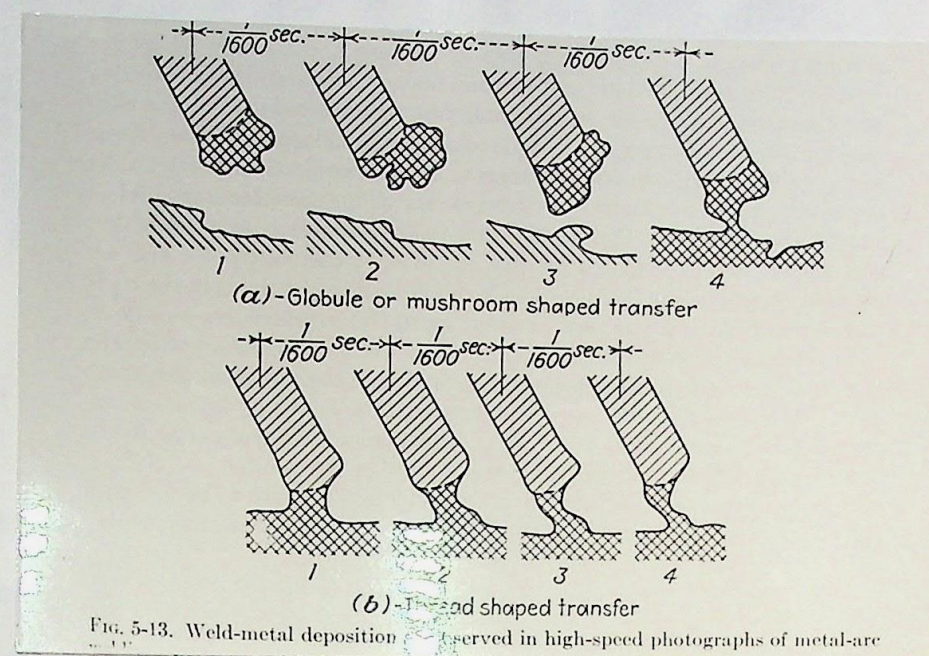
Weld -metal deposition as observed in high-speed photographs of metal-arc.
